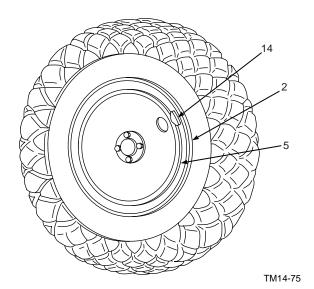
Positioning Bead Seat Band and Outer Rim Flange
